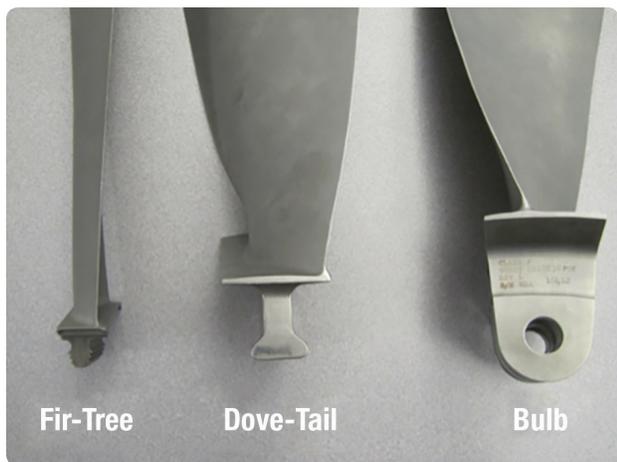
Common designs of compressor blade attachment to the rotor disk.
